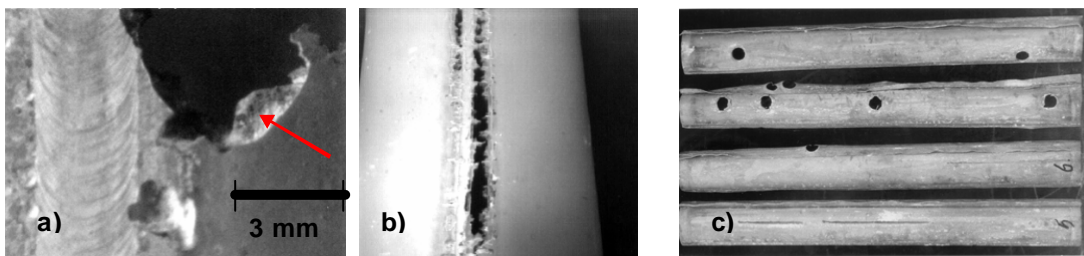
a) The corner of the fuel meat has been exposed at the top of a plate from assembly 45c 045. b) extensive pitting corrosion in the non-fuel section of assembly 45c 045, resulting in compromised structural integrity. c) Punched plates from UED 802.
